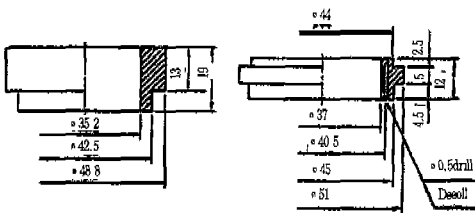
Dimensions of alumina ring (left) & carbon ring (right)
